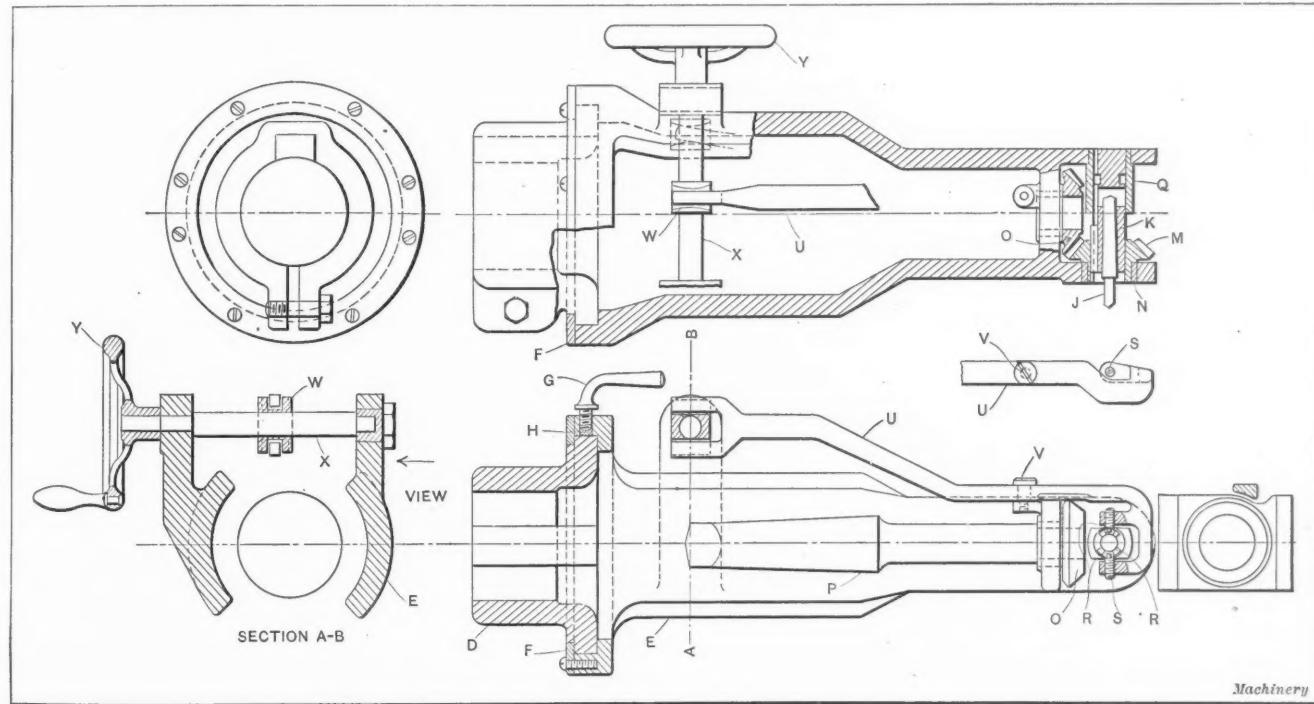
Offset Drill Head designed for drilling Horizontal Holes on Radial Drill
